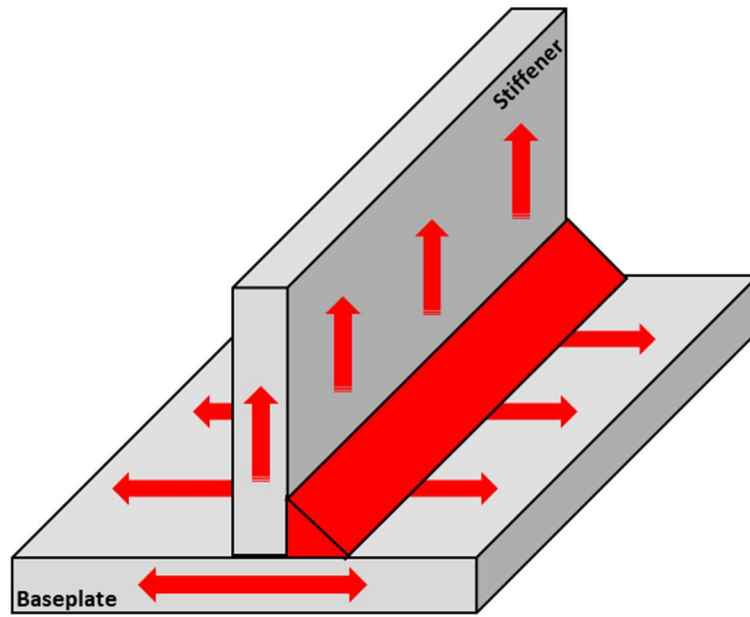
Schematic showing direction of heat flow through the welded fillet joint.
